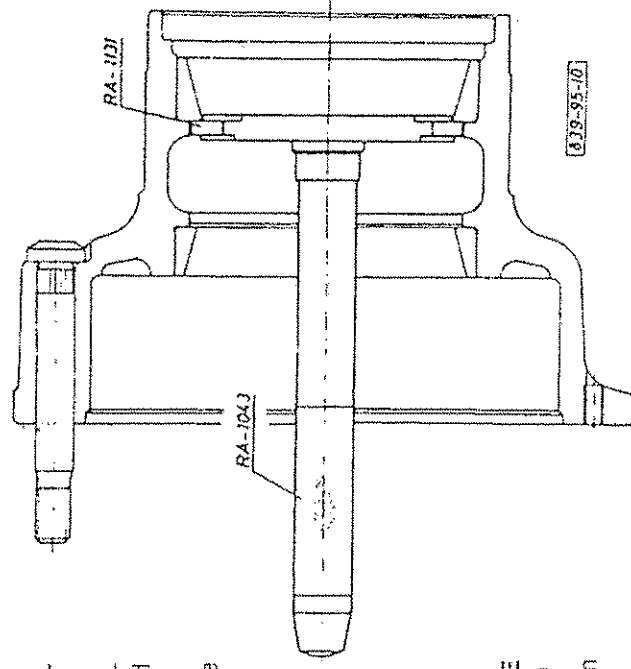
DRIVING OUT THE CUP OF THE OUTER TAPER ROLLER BEARINGS
